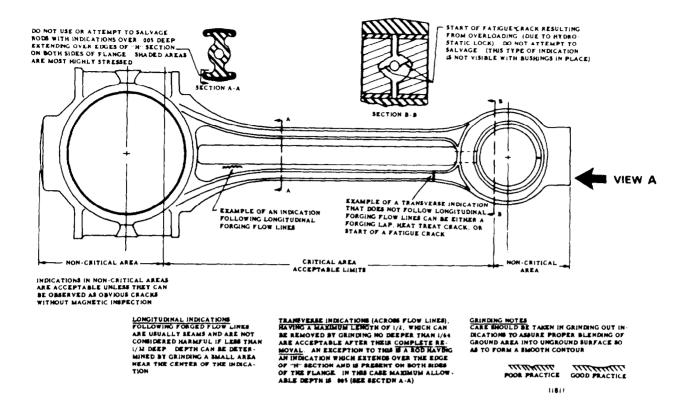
B-126. Magnetic Particle Inspection Limits for Connecting Rod
